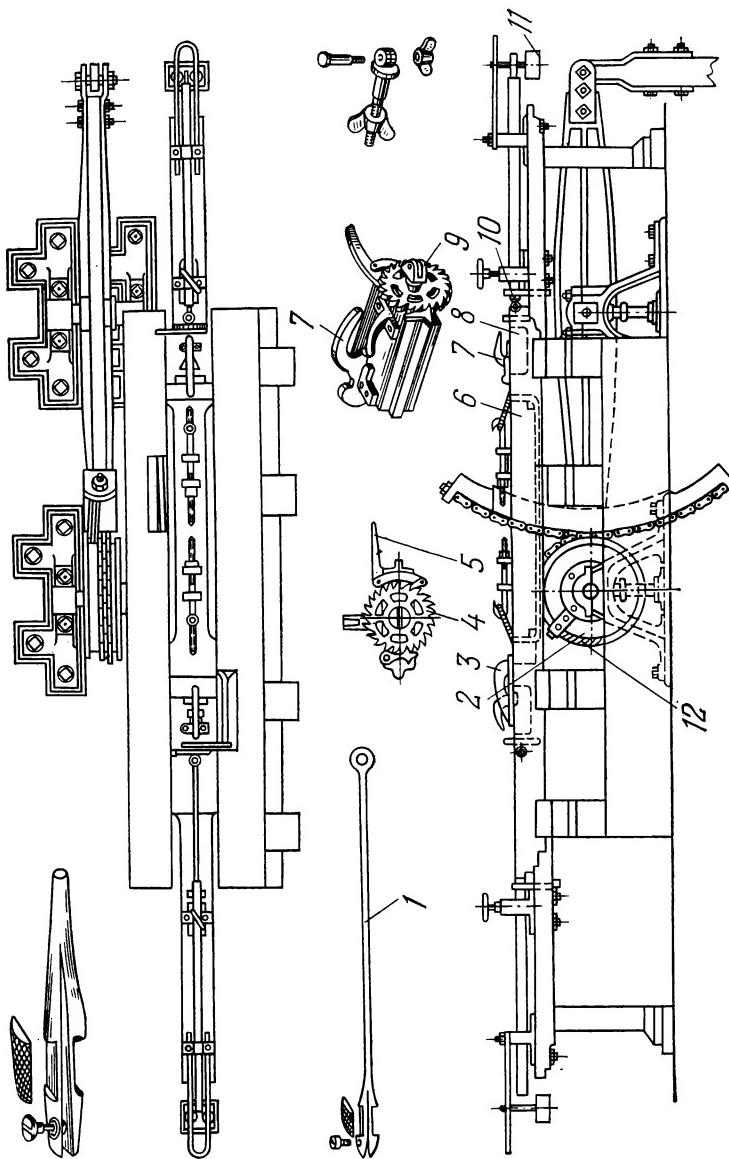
Diagrams of units and parts of Zakhava's "reaming" machine
